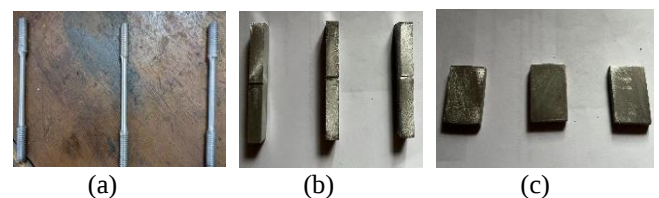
(a) Final Specimen for Tensile Test, (b) Final Specimen for Impact Test, (c) Final Specimen for Hardness Test.
